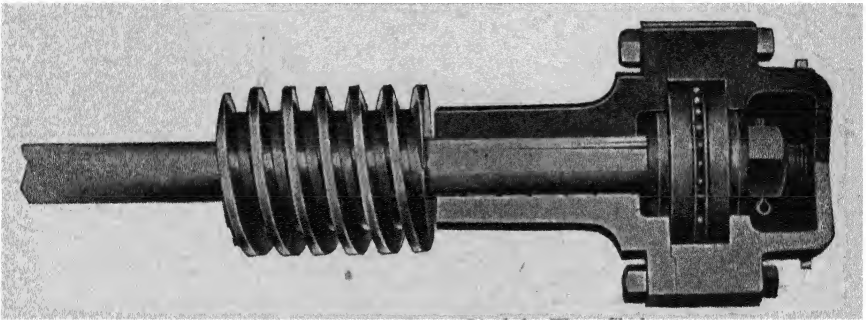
Ball Bearing Thrust Block for Worm Shaft
